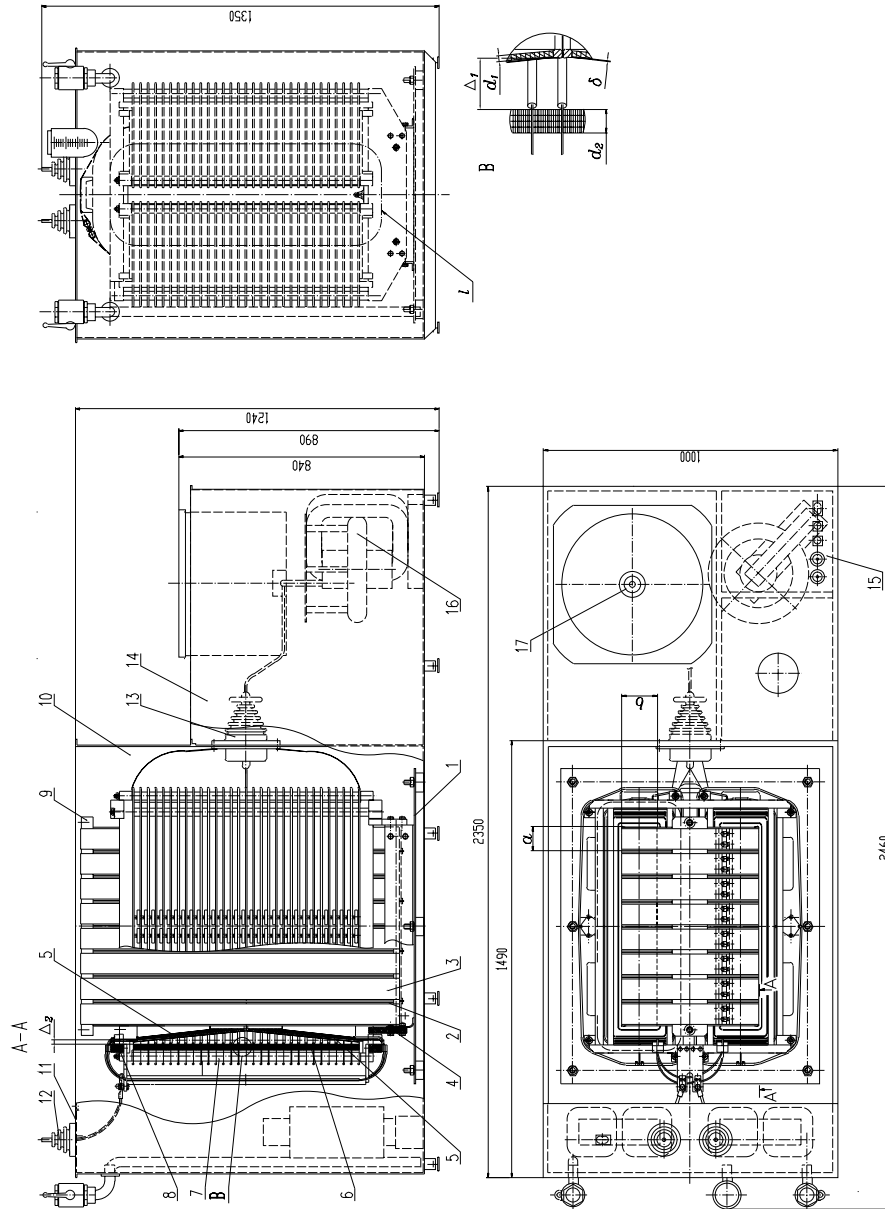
Pulse transformer. 1 – base, 2 – split cores, 3 – tape clips, 4 – support frame, 5 – primary winding, 6 – secondary winding sections, 7 – insulating ties, 8 – upper forcing frame, 9 – channel section, 10 – transformer tank, 11 – transformer connectors, 12 – input, 13 – output, 14 – klystron tank, 15 – klystron connectors, 16 – heater transformer, 17 – klystron socket.
